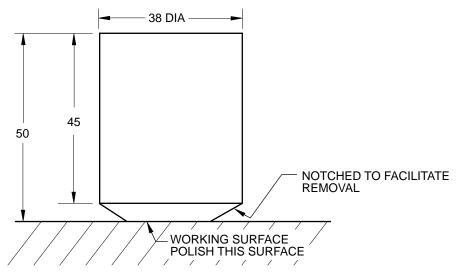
Typical Casting coupon showing location of surface for microstructure analysis.
